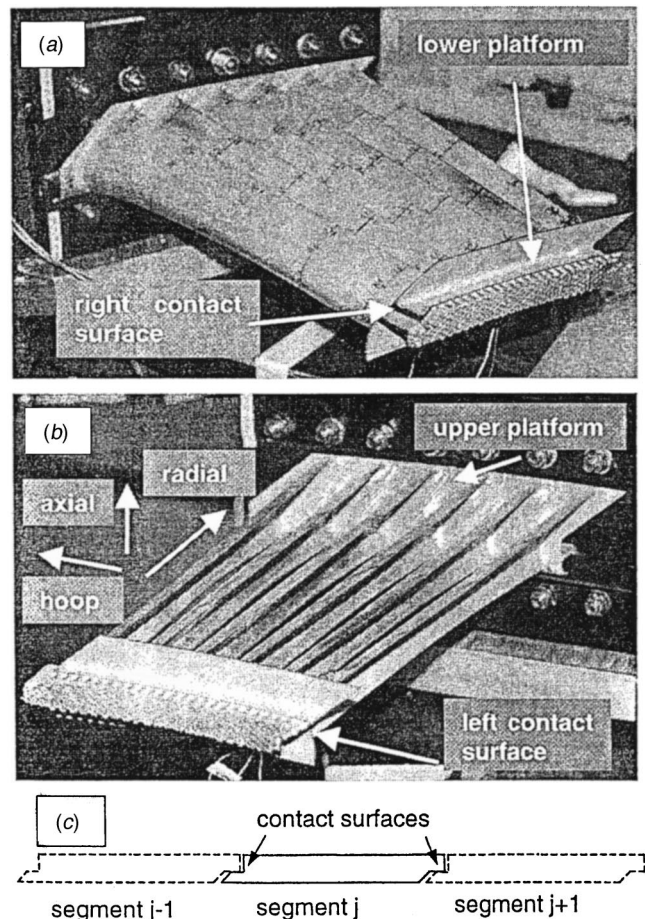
Stator segment; (a) right side view, (b) left side view, (c) schematics of the assembly
